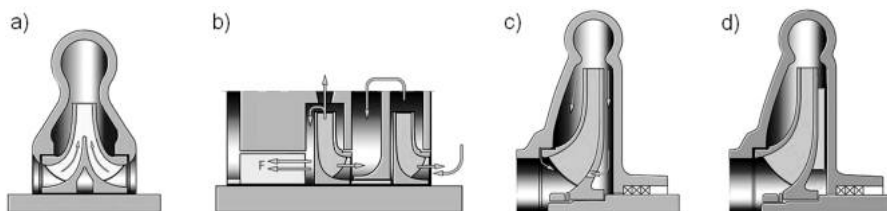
Different measures to balance axial thrust: a) double suction impeller, b) balancing drum, c) balance holes, d) back vanes [130]
